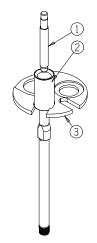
Valve Sleeve and Stem Disassembly.1-Punch, 2-Valve Sleeve and Stem, 3-Arbor Press Plate Assembly.
